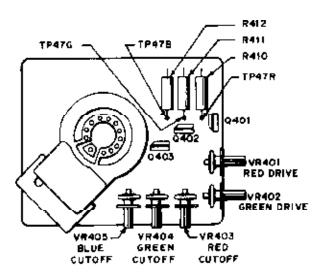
Neck Board—Component Side (With Horizontally Mounted CRT)
